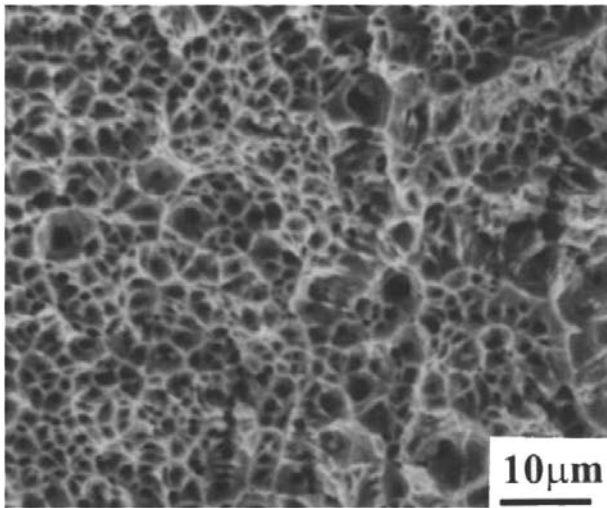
Fractograph of HIPed stainless steel tensile tested at room temperature.
